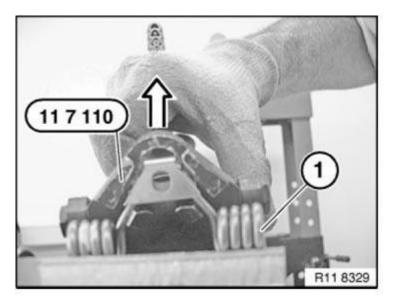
Positioning Special Tool 11 7 110 On Return Spring Courtesy of BMW OF NORTH AMERICA, INC.
